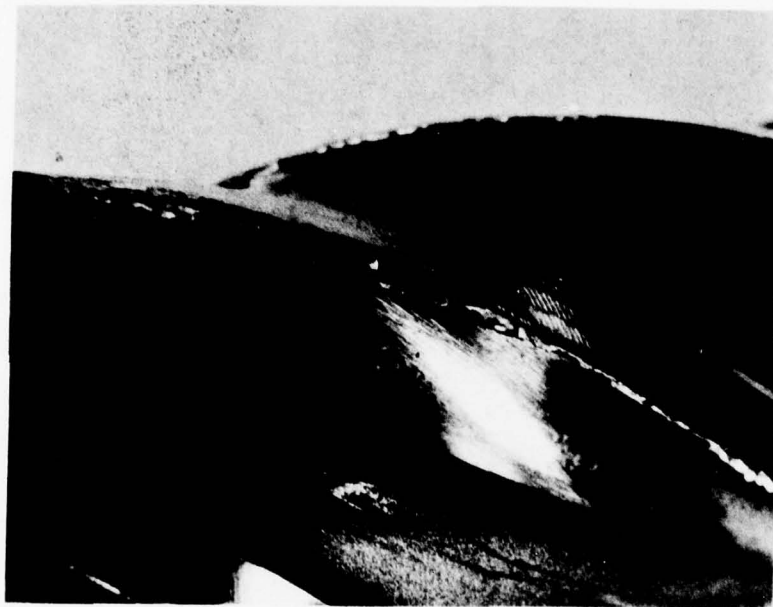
END MILL WITH CHIPPING ALL ALONG CUTTING EDGE
